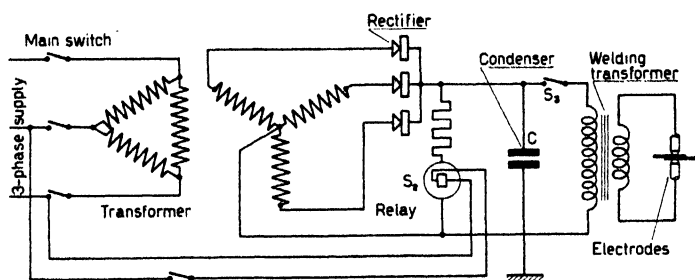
Wiring diagram of a capacity spot welding machine.
